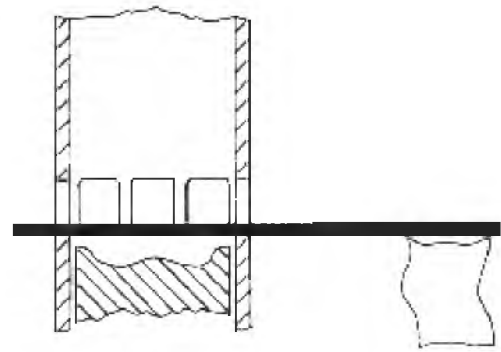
"Stop-Bar" Inserted Through Cylinder Ports
